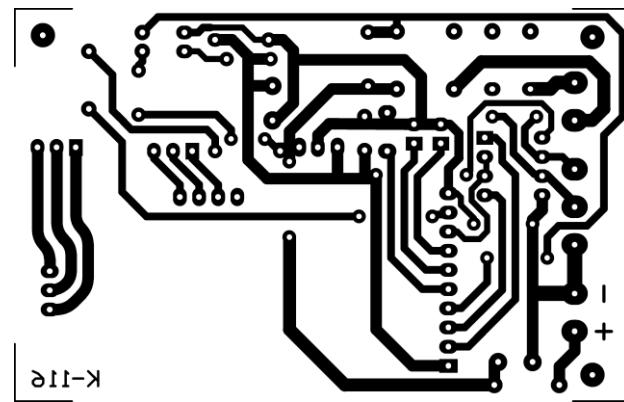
K-111 PCB map (Scale 1:1 Printable on board)
